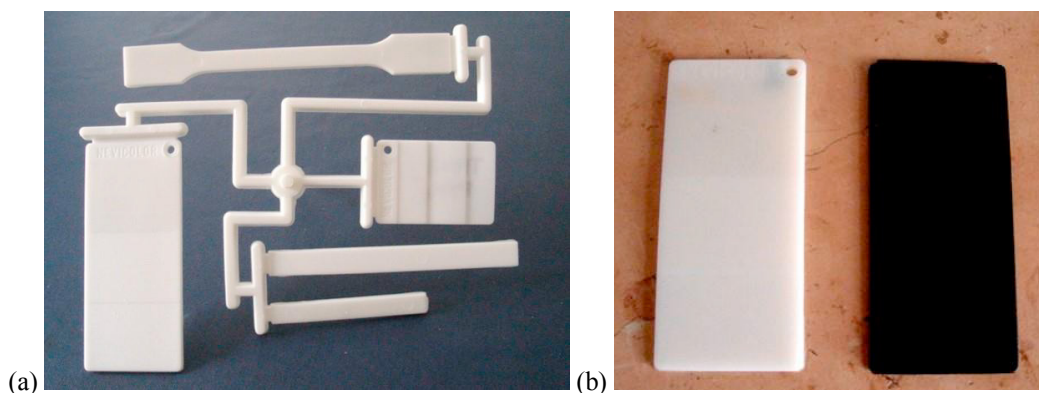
Examples of injection molded pieces for the preparation of specimen for testing: (a) the part as molded; (b) rectangular sub-pieces to obtain the square specimen for the tribological tests
